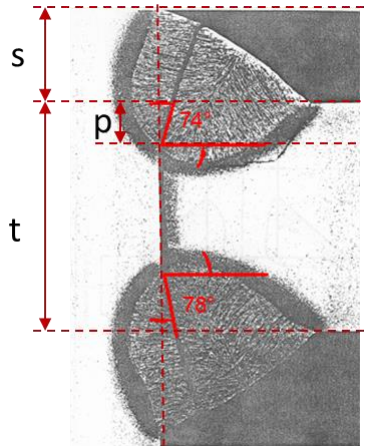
A typical weld root cracking through weld throat in load-carrying fillet welded cruciform specimen ($s/t \approx 0.65$ and $p/t \approx 0.2$)
